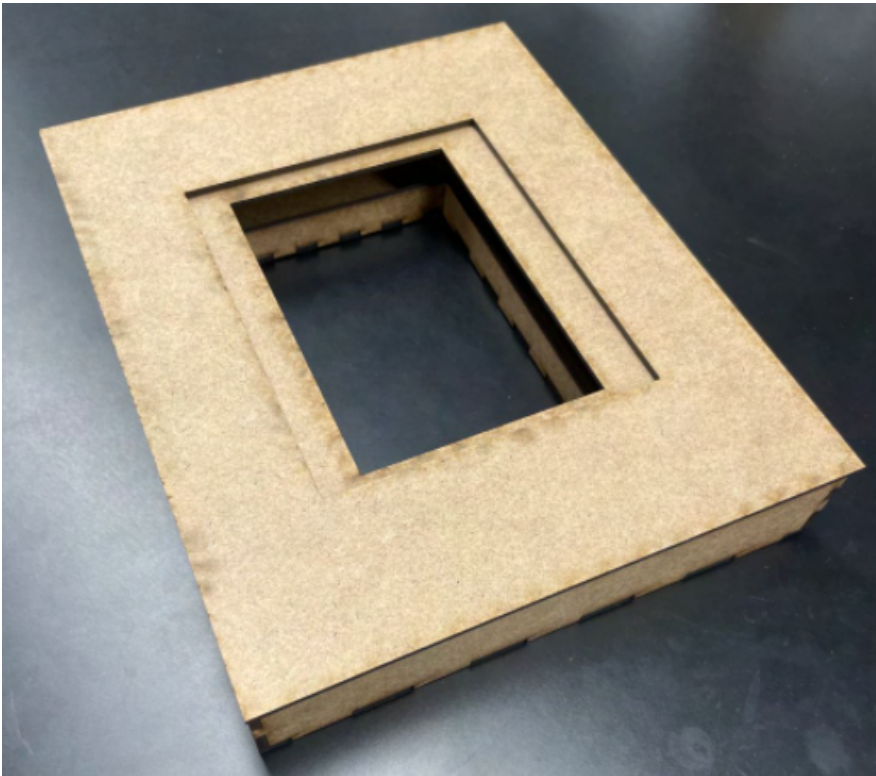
Photo of the laser cut HDF prototype with all the pieces assembled together.
